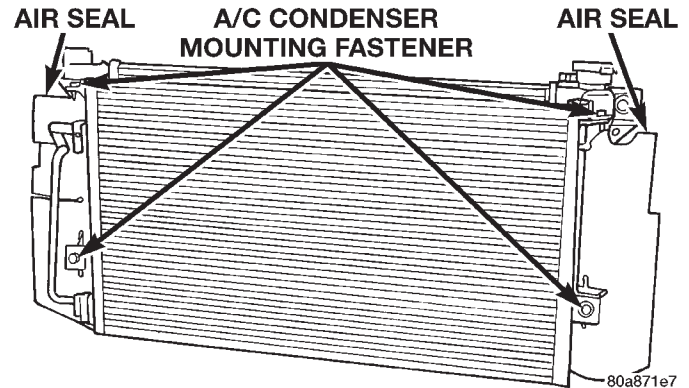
Air Conditioning Condenser Mounting Fasteners
